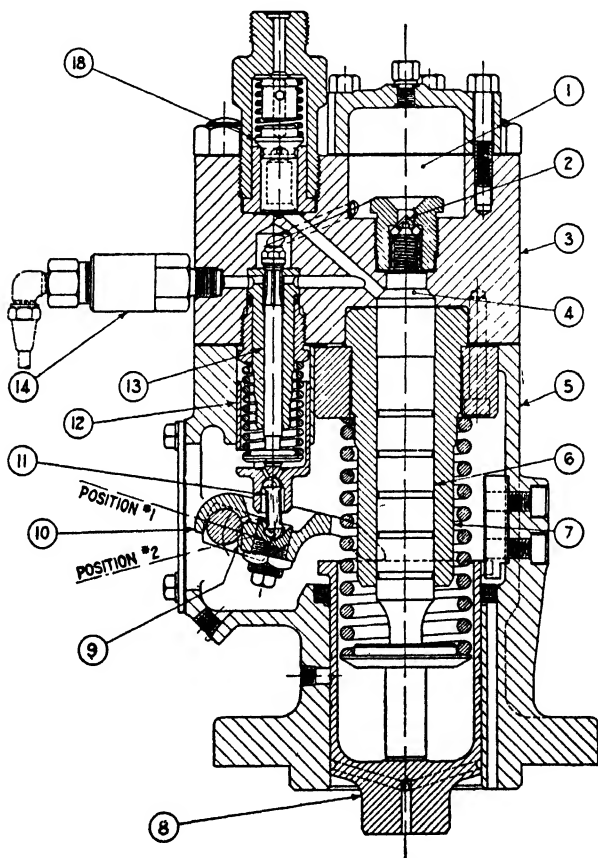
DECO SINGLE-UNIT PUMP WITH SPILL VALVE.
